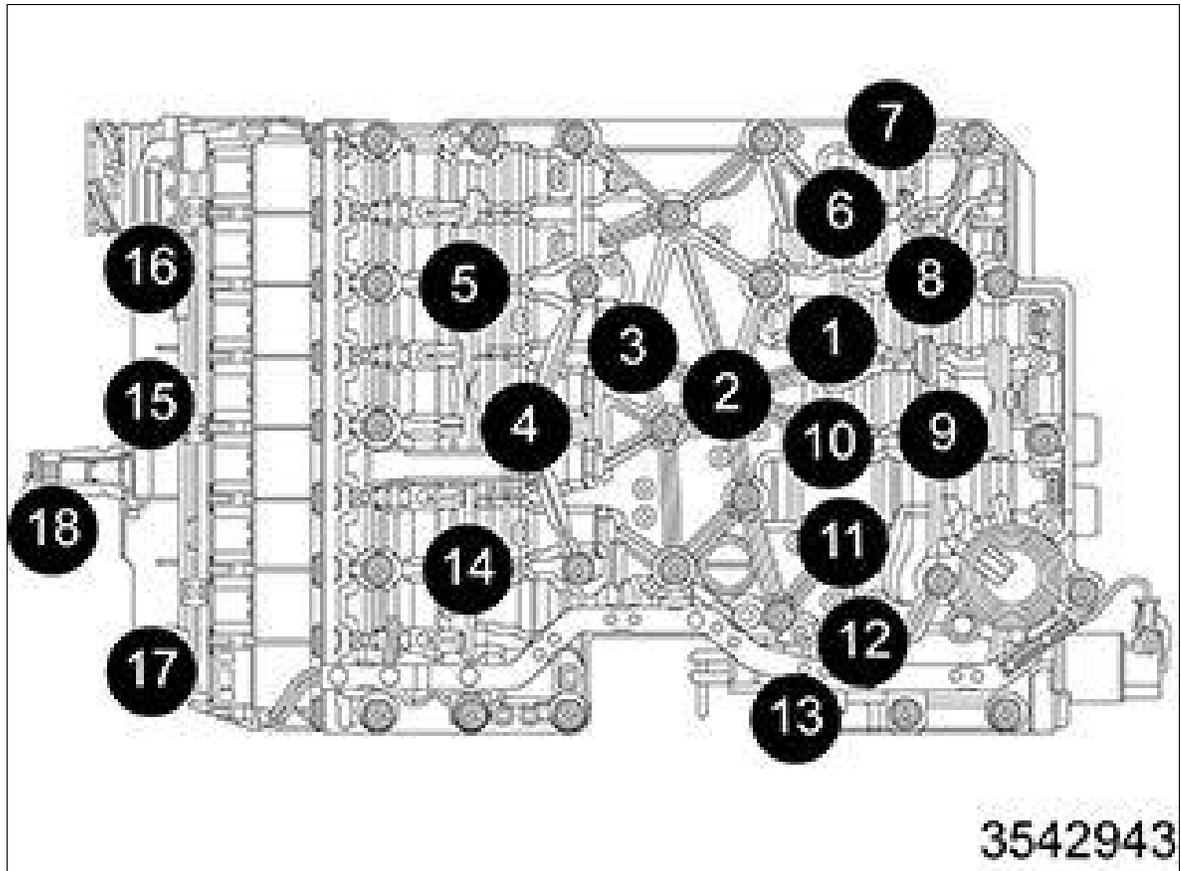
Hydraulic Impulse Storage Unit & Bolts
